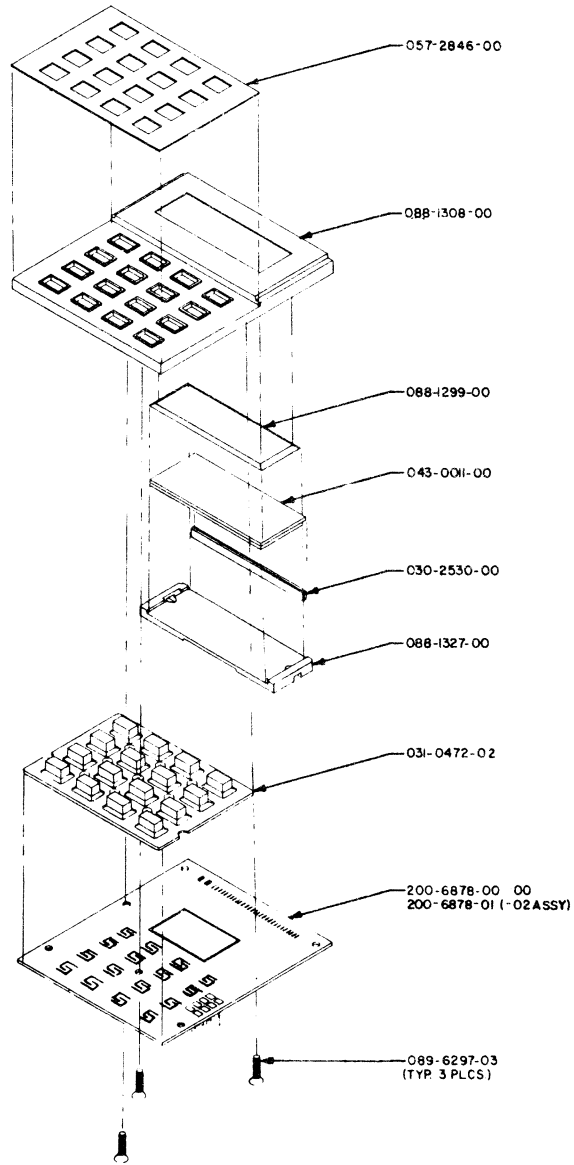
KEYBOARD/DISPLAY ASSEMBLY
